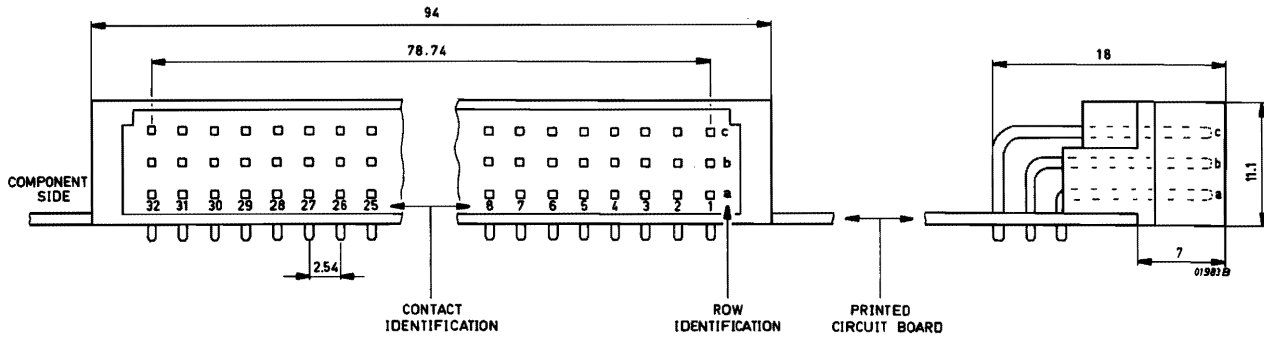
BOTTOM VIEW AND SIDE VIEW OF THE BACKPANEL CONNECTORS
